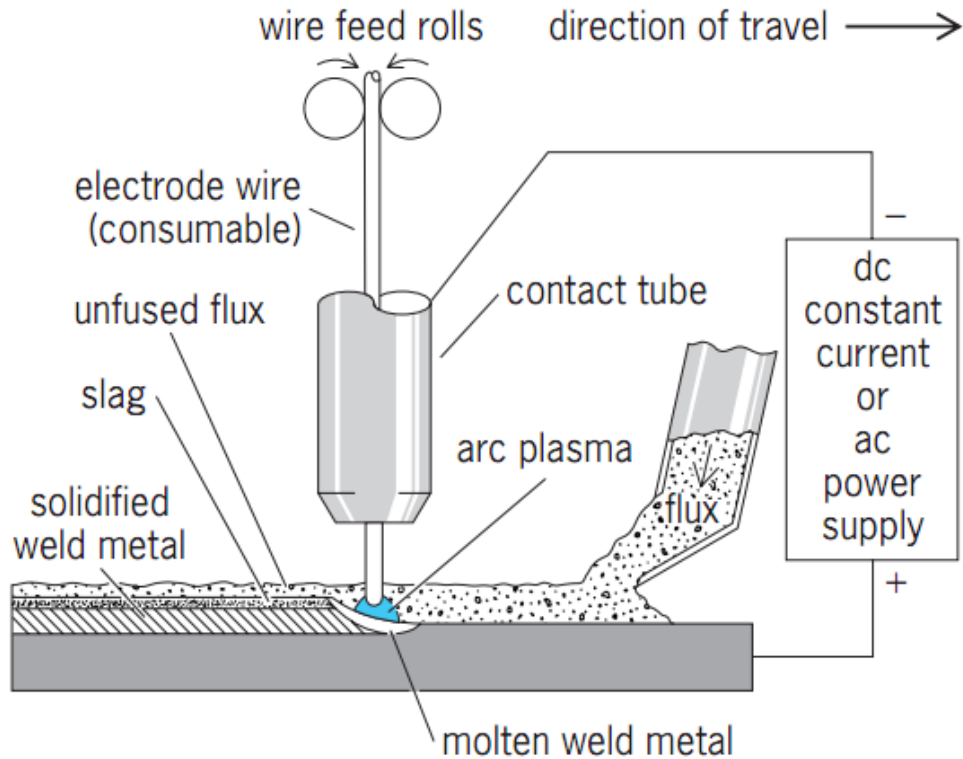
Mechanism of Submerged Arc Welding [18]
